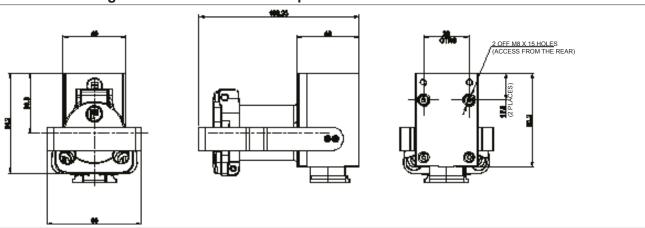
Dimensional Drawing - S40 with stainless steel padlockable dustcover
